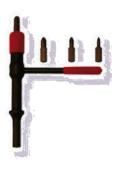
Wivco "Shake and Break" screw removal tool. Photo credit: Tyler tool
